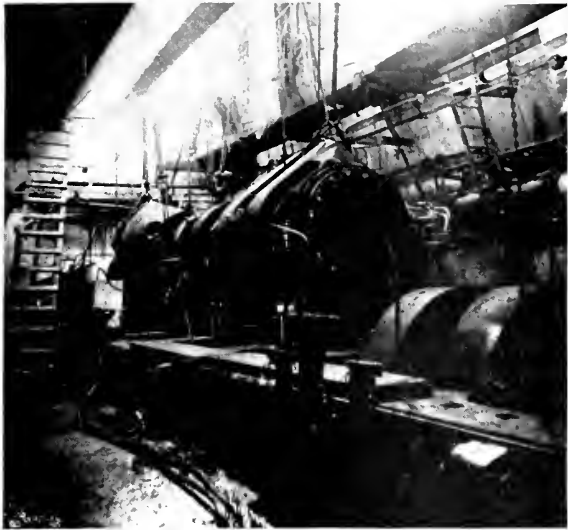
Crankshaft being removed from bed of motor vessel Poelau Laut.
